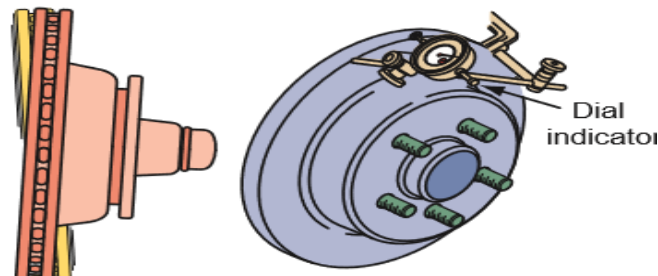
2 Checking The Lateral Run Out Of A Brake Rotor.
